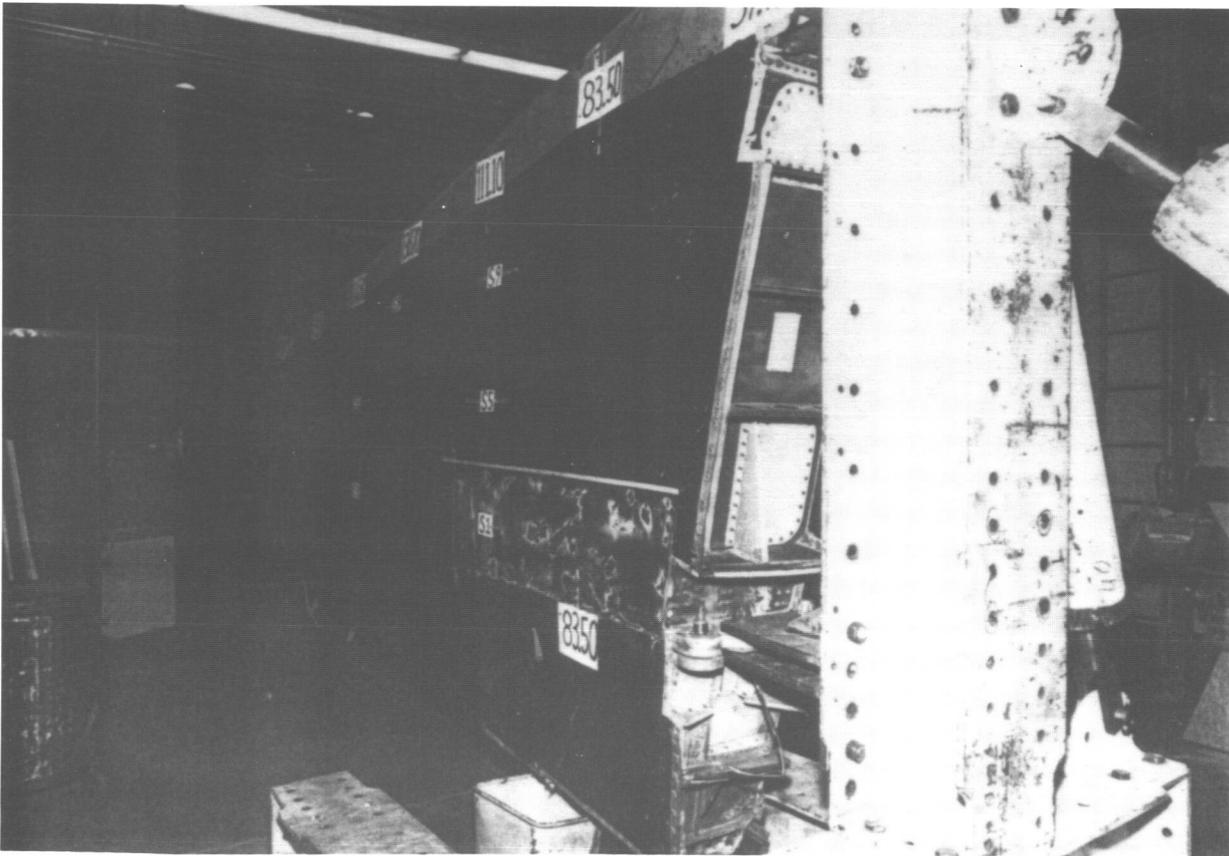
A. Stabilizer Mounted for Inspection, Upper Surface
